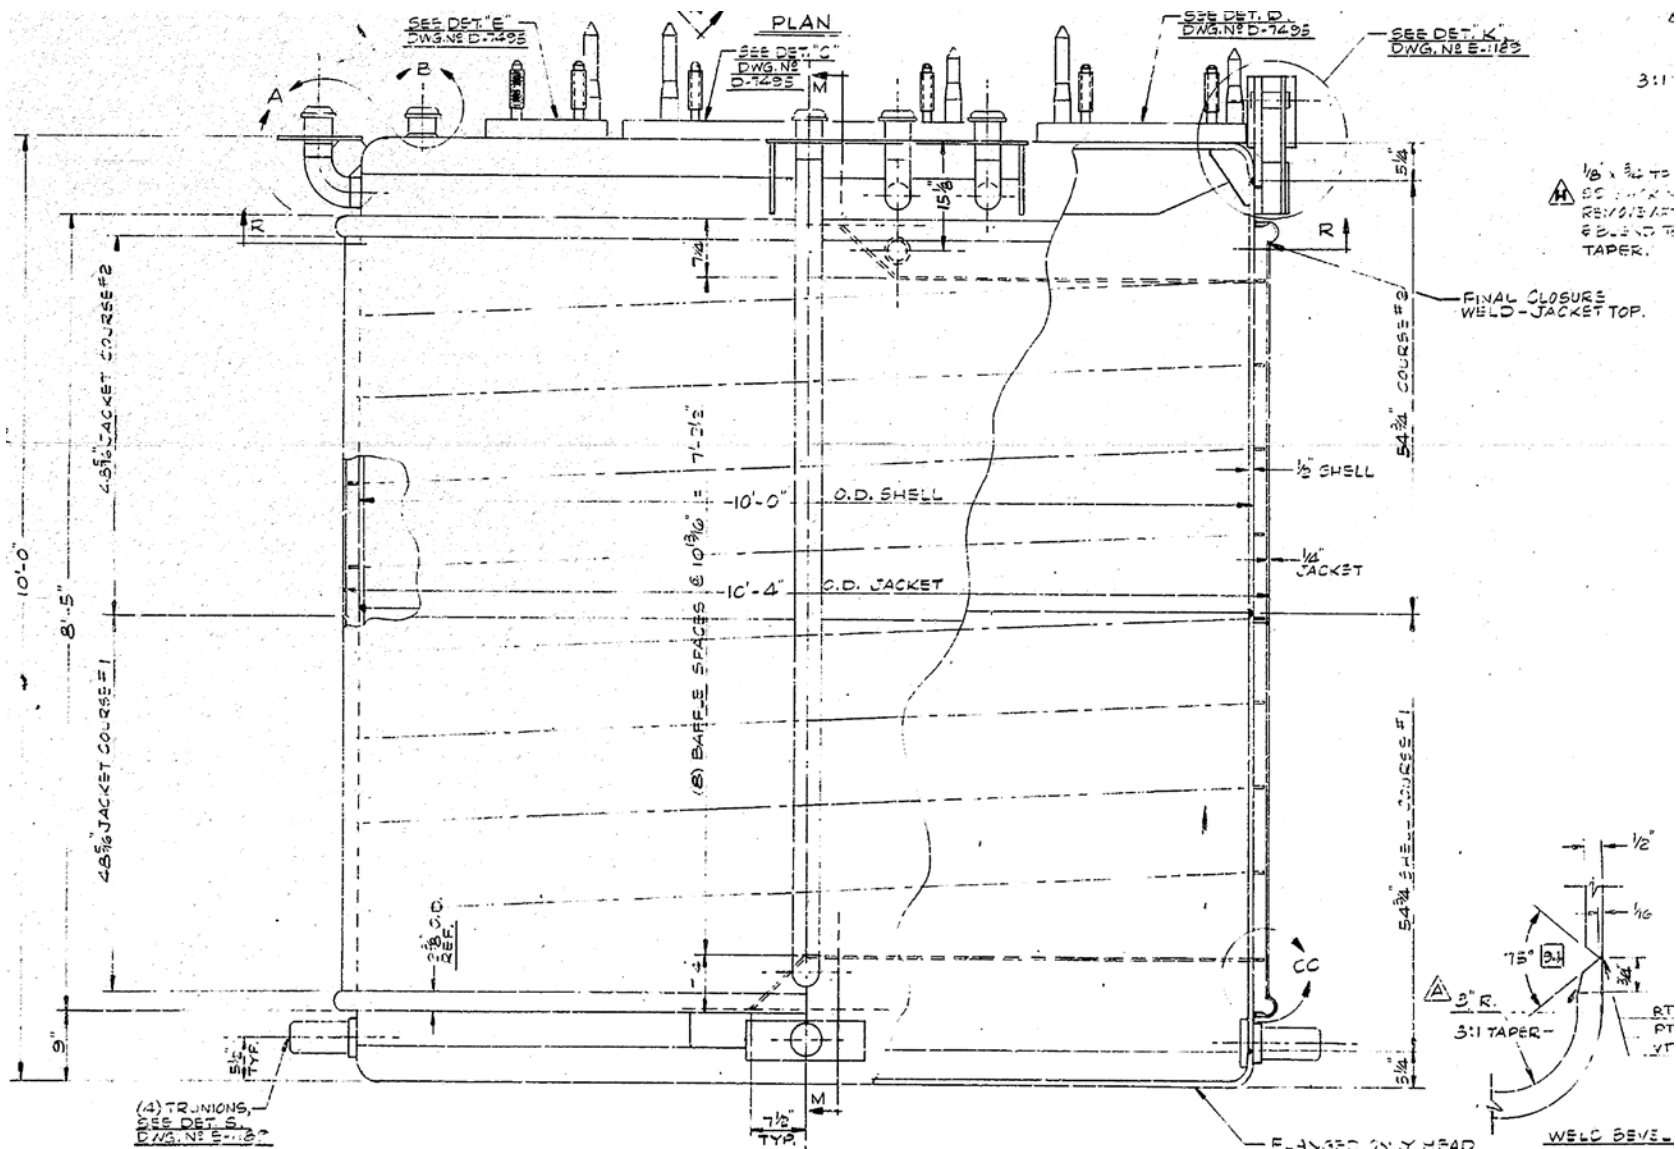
MFHT Elevation View (From Drawing E-1188 Rev. 1)
